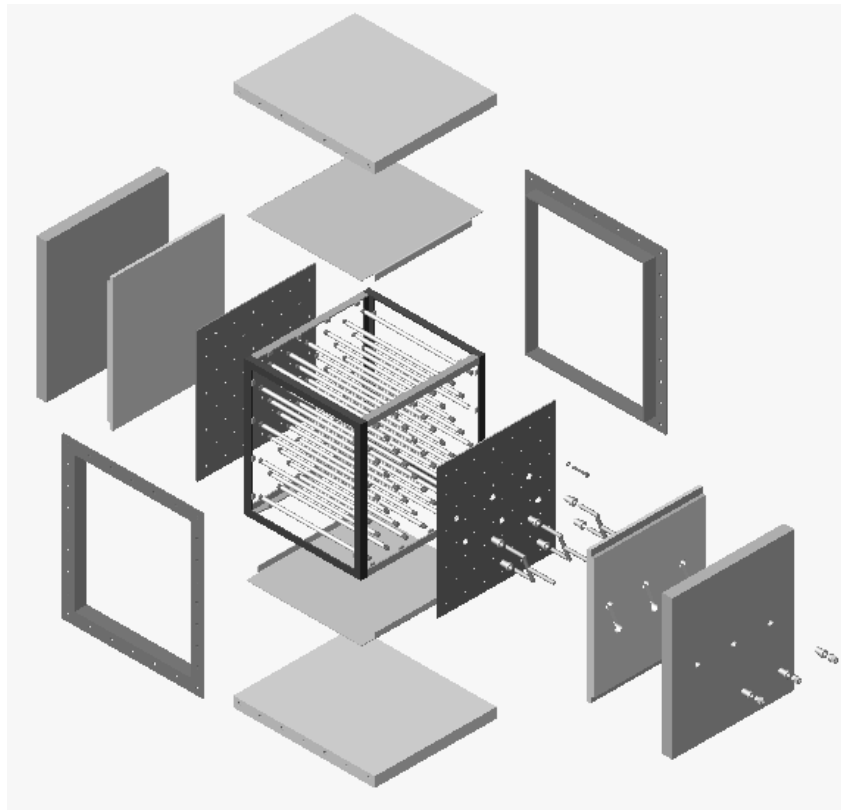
Exploded view of the 3-D model of a heater cassette showing the subframe with heater element insulation tubes and other assembly parts. Spirally wound heater elements are not shown.
